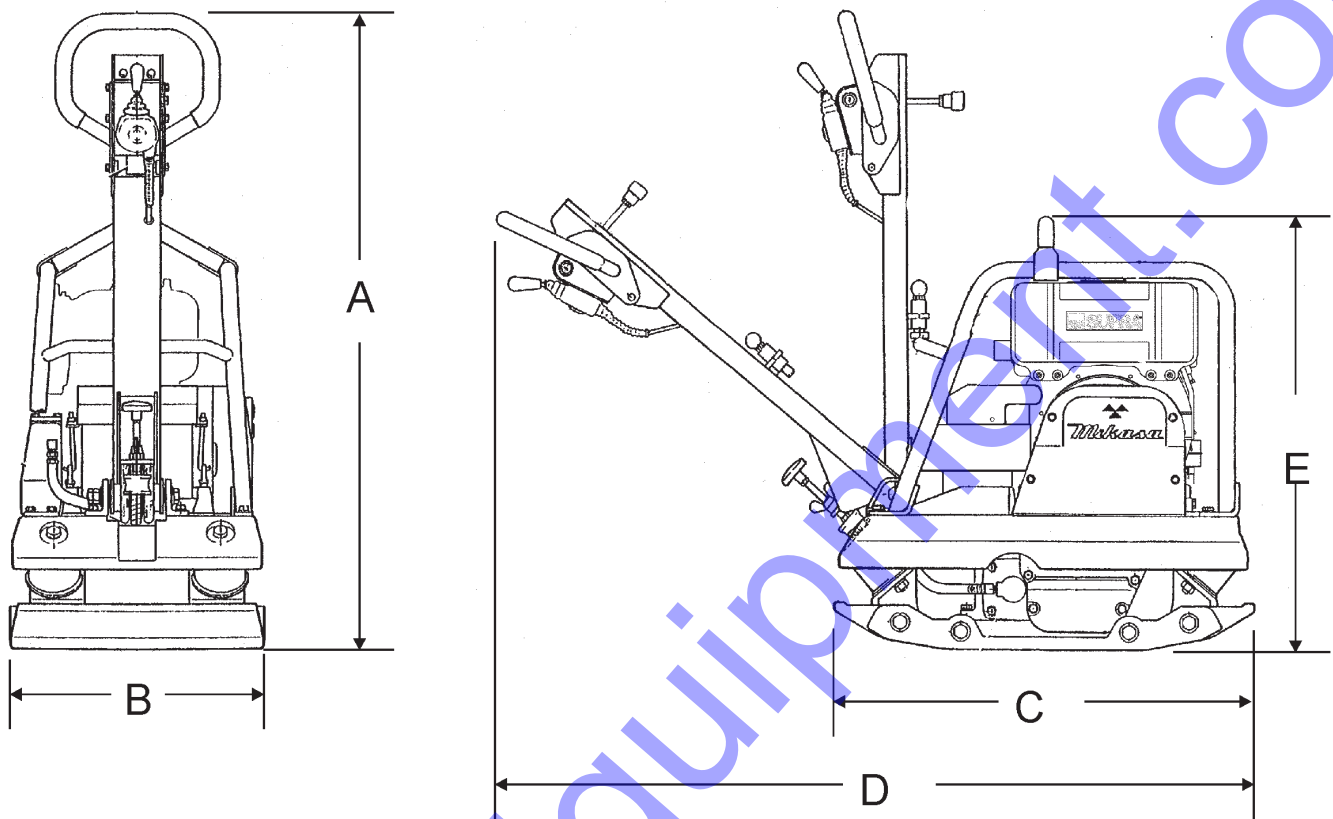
MVH502DSB/DSB2 Reversible Plate Compactor Dimensions
